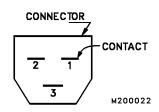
SENSOR SIDE CONNECTOR VIEW
